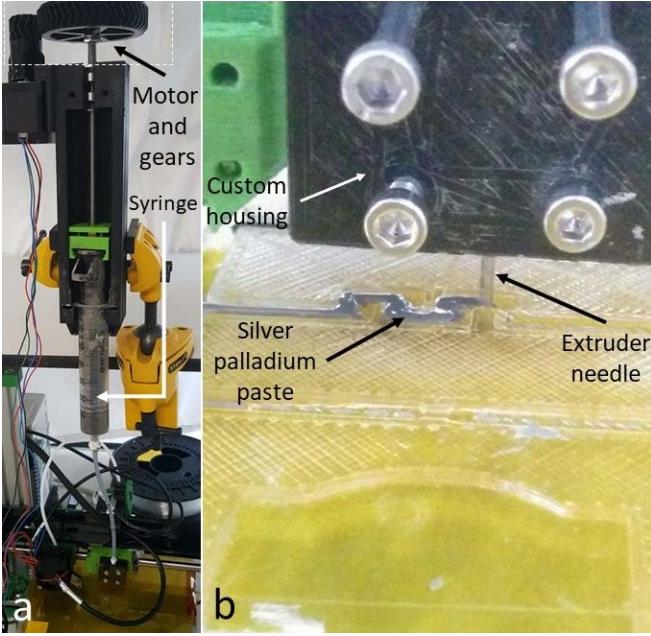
Modified 3D printing set up. (a) Conductive paste extrusion system. (b) Syringe and custom housing for the extrusion mechanism.
